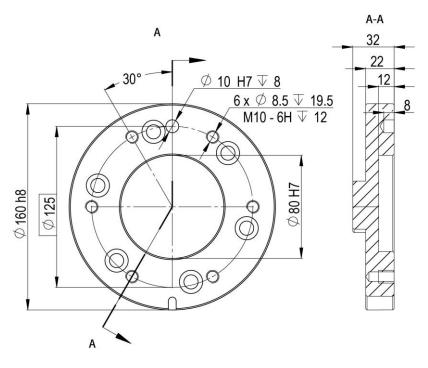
The flange dimension diagram of wrist of AIR165-2750A manipulator
